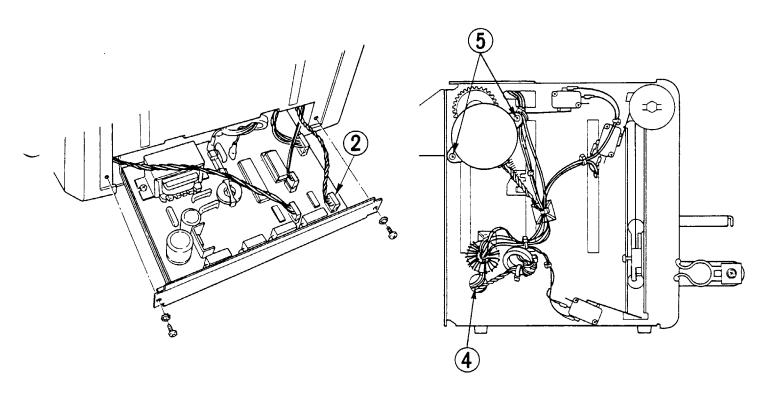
PAPER FEED MOTOR REMOVAL
